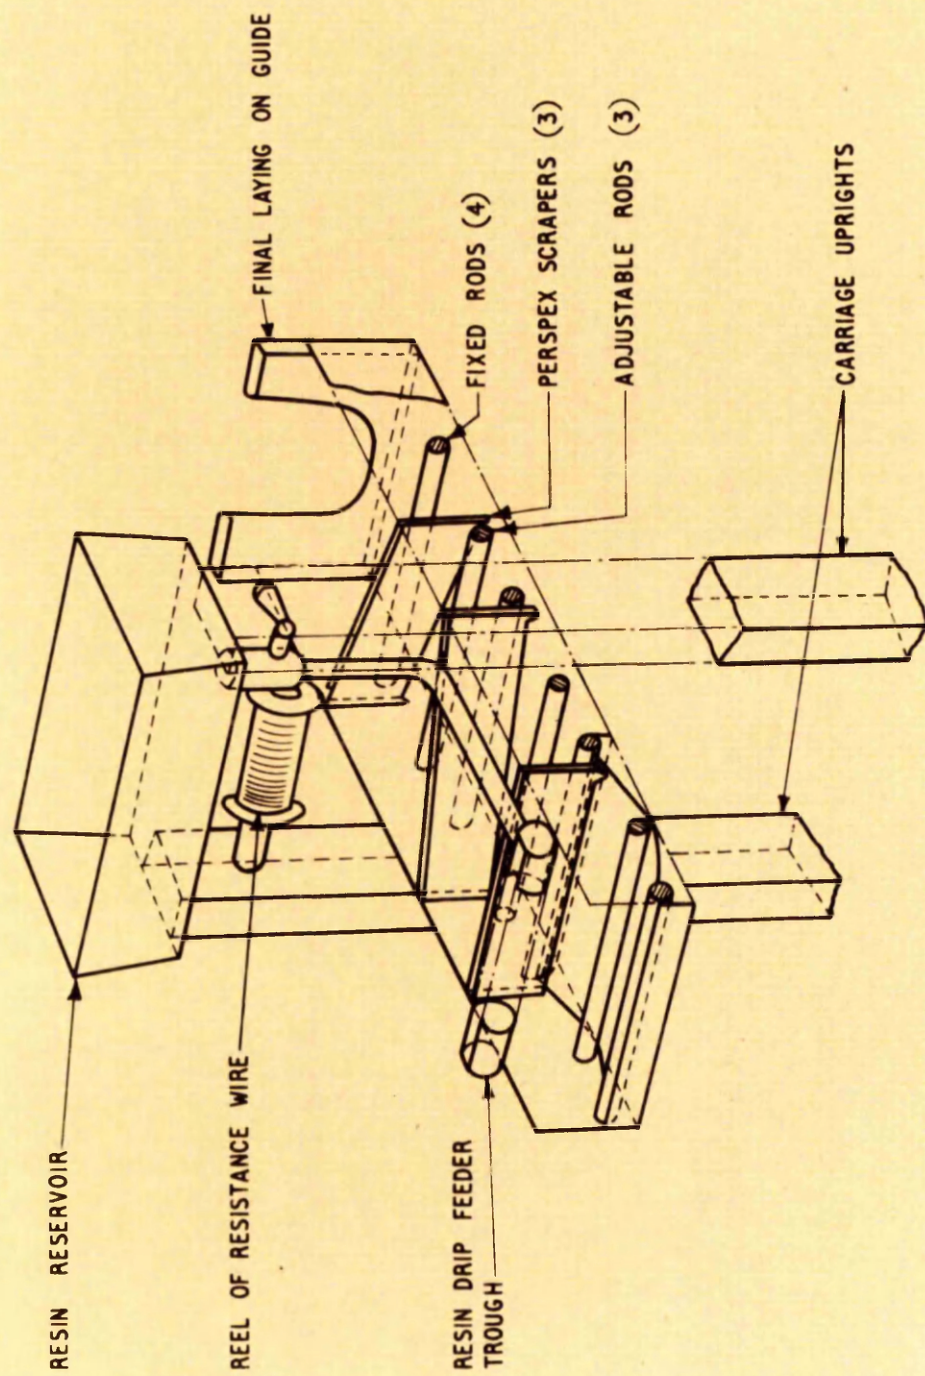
MODIFIED CARRIAGE ASSEMBLY.
